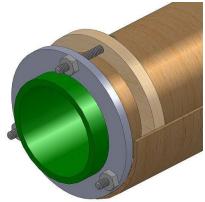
Secure the motor casing into the 38 mm tube using the 4-40 machine screws/nuts over the aluminum retention ring
